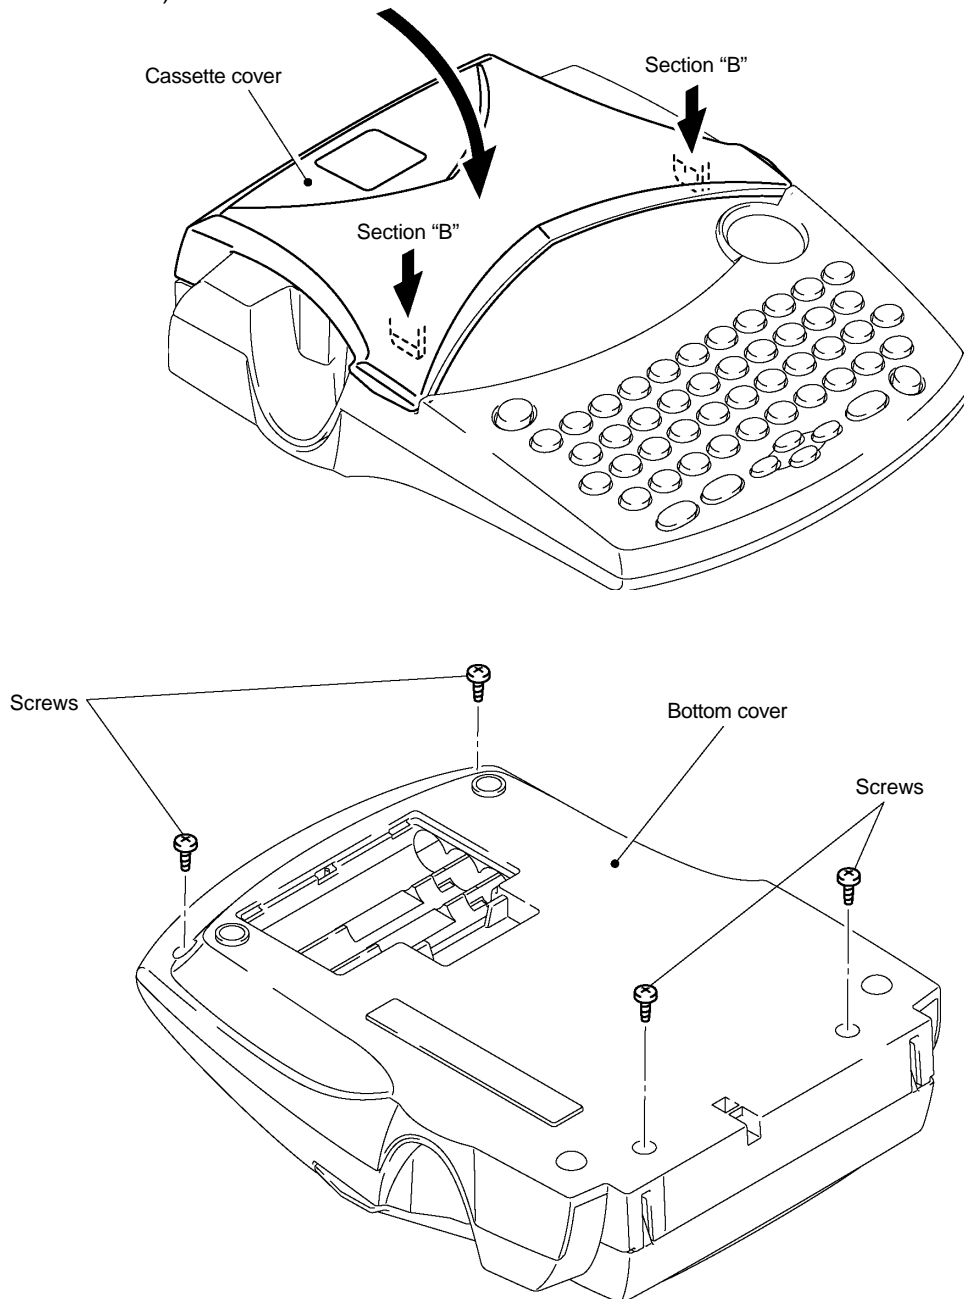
Removing the Bottom Cover (1) (PT-1900/1910)
